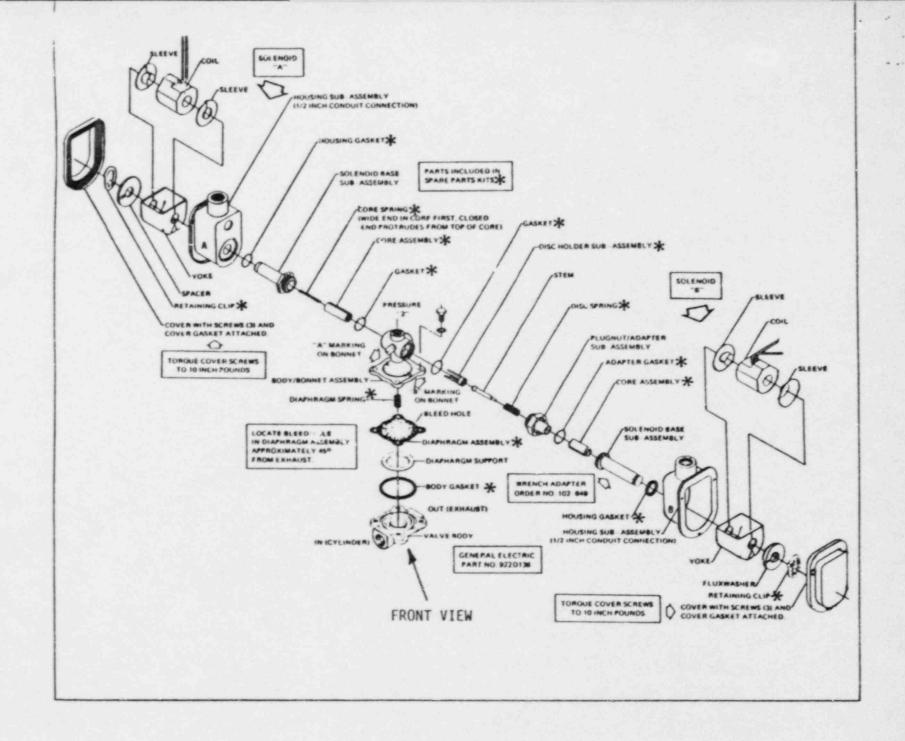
Scram Pilot Air Valve (139) - Exploded View
